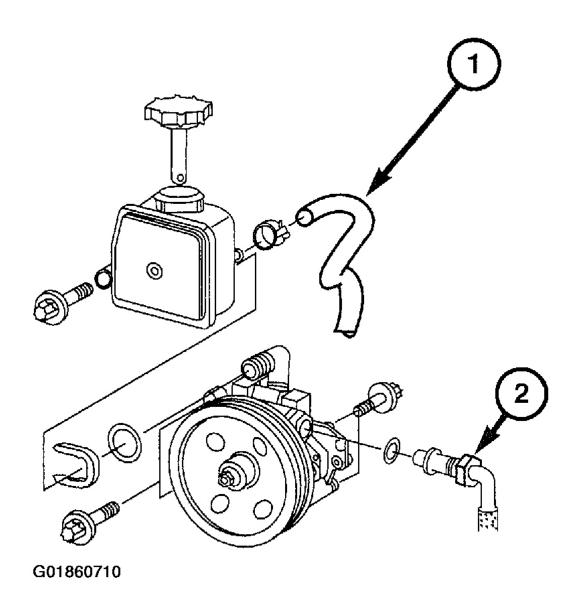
Installing Power Steering Pump, Return Hose & Pressure Hose Courtesy of DAIMLERCHRYSLER CORP.
